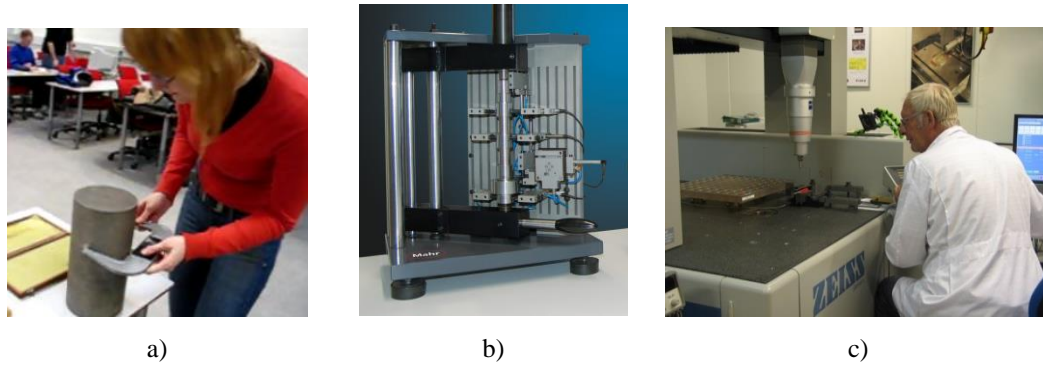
Dimensional metrology can be performed with: a) hand tools ;b) fixtures with gauges [6]; c) CMM.
